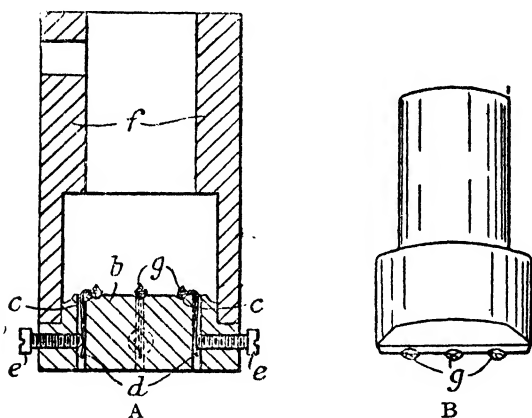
A and B.—Casting metal around diamonds. A, construction of mould; B, finished diamond tool
